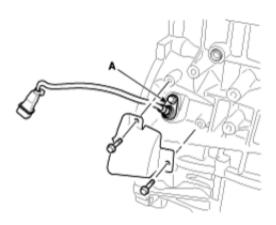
Identifying CKP Sensor Courtesy of HYUNDAI MOTOR CO.
